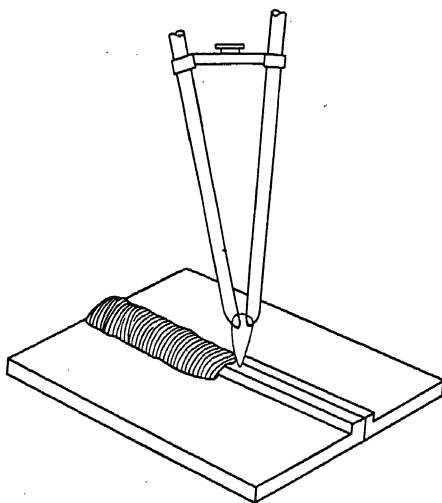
Carbon arc used in making a flange weld.
